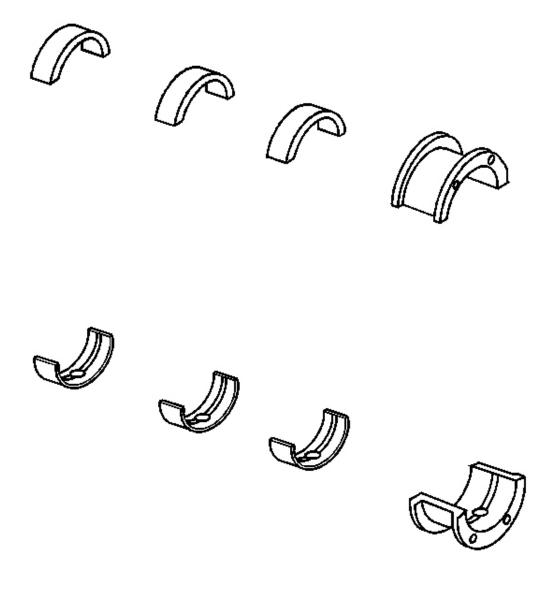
Crankshaft Bearings Courtesy of GENERAL MOTORS CORP.
